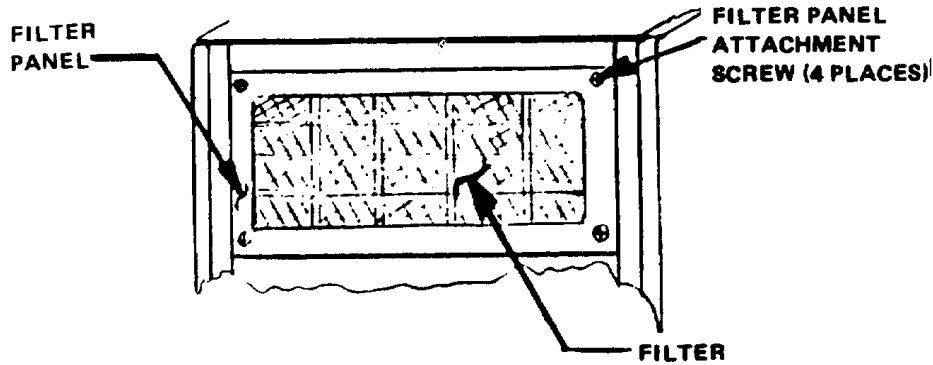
Front Cabinet Filter - Units 1 and 3
